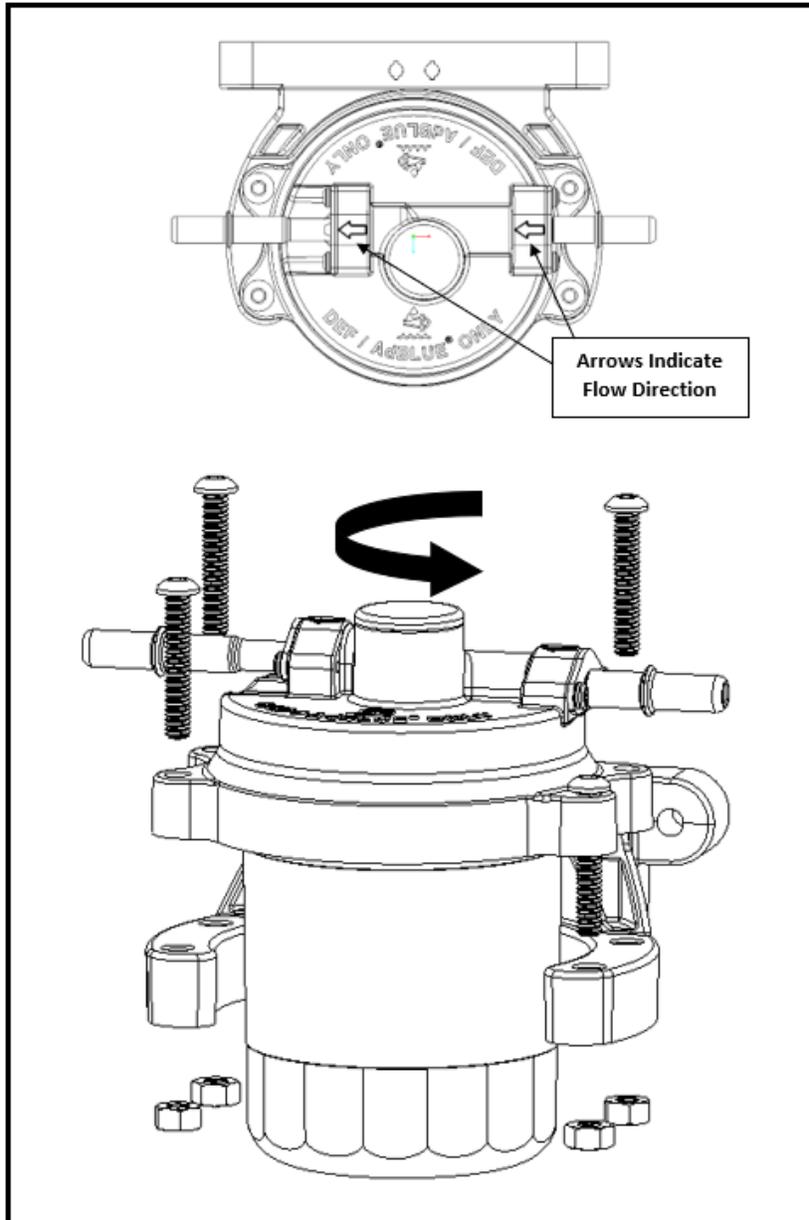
Rotation of Filter Assembly to Achieve Opposite Flow Direction
